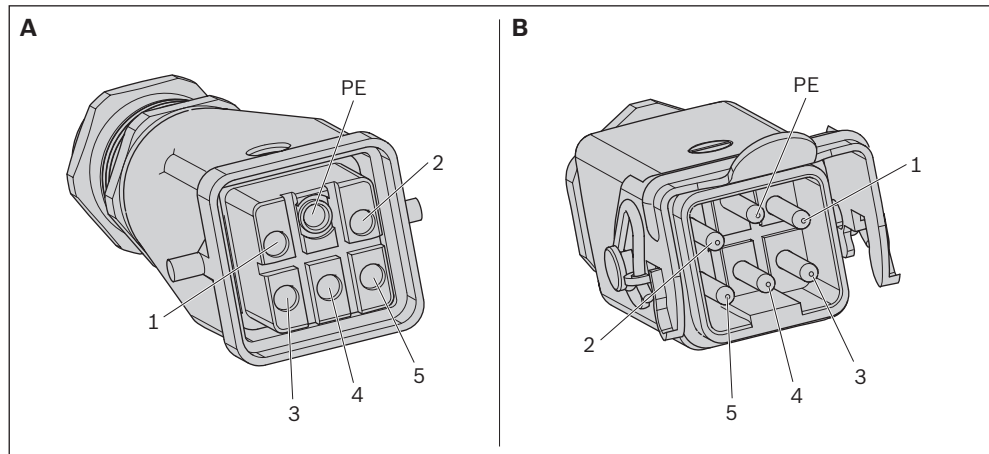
Motor connection with plug (AT = S), push-in fitting
